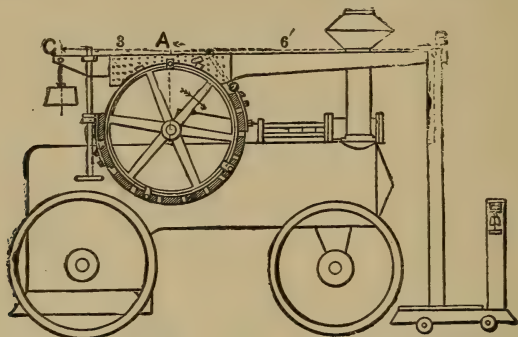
BRAKE APPLIED TO PORTABLE ENGINE.
